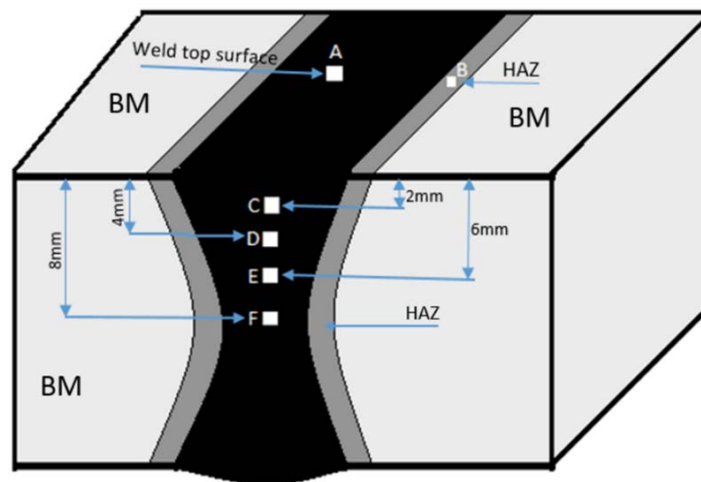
Schematic of the weldment indicating different positions used for EBSD and optical microscopy investigation.
